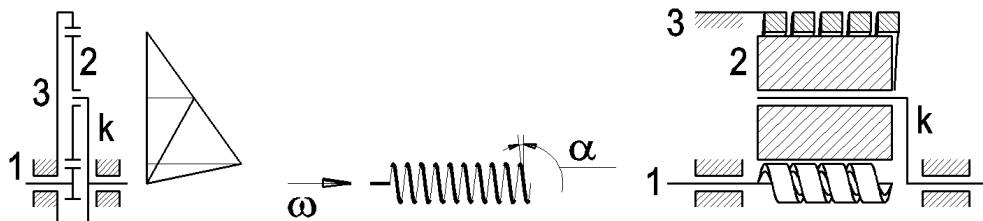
An io type epicyclic drive containing two helical torsion springs as basic elements
